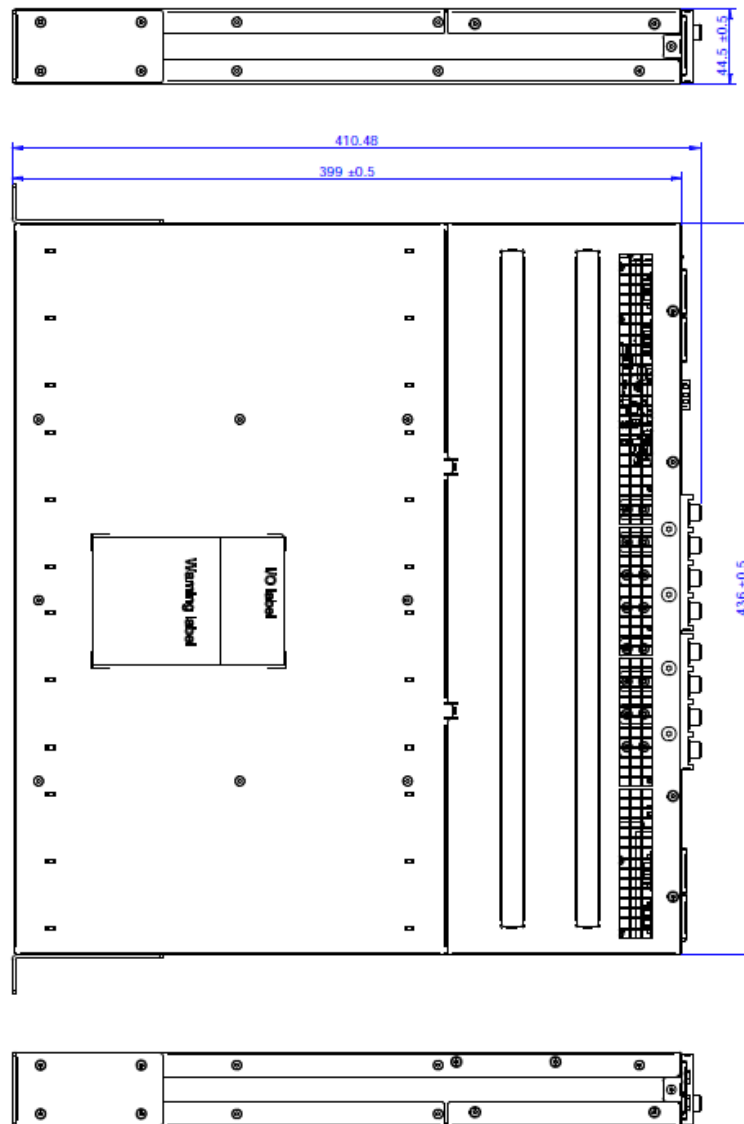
SPSTET3-01&SPSTET3-01N Mechanical Drawing with Dimensions (Front, Top, Side View)
